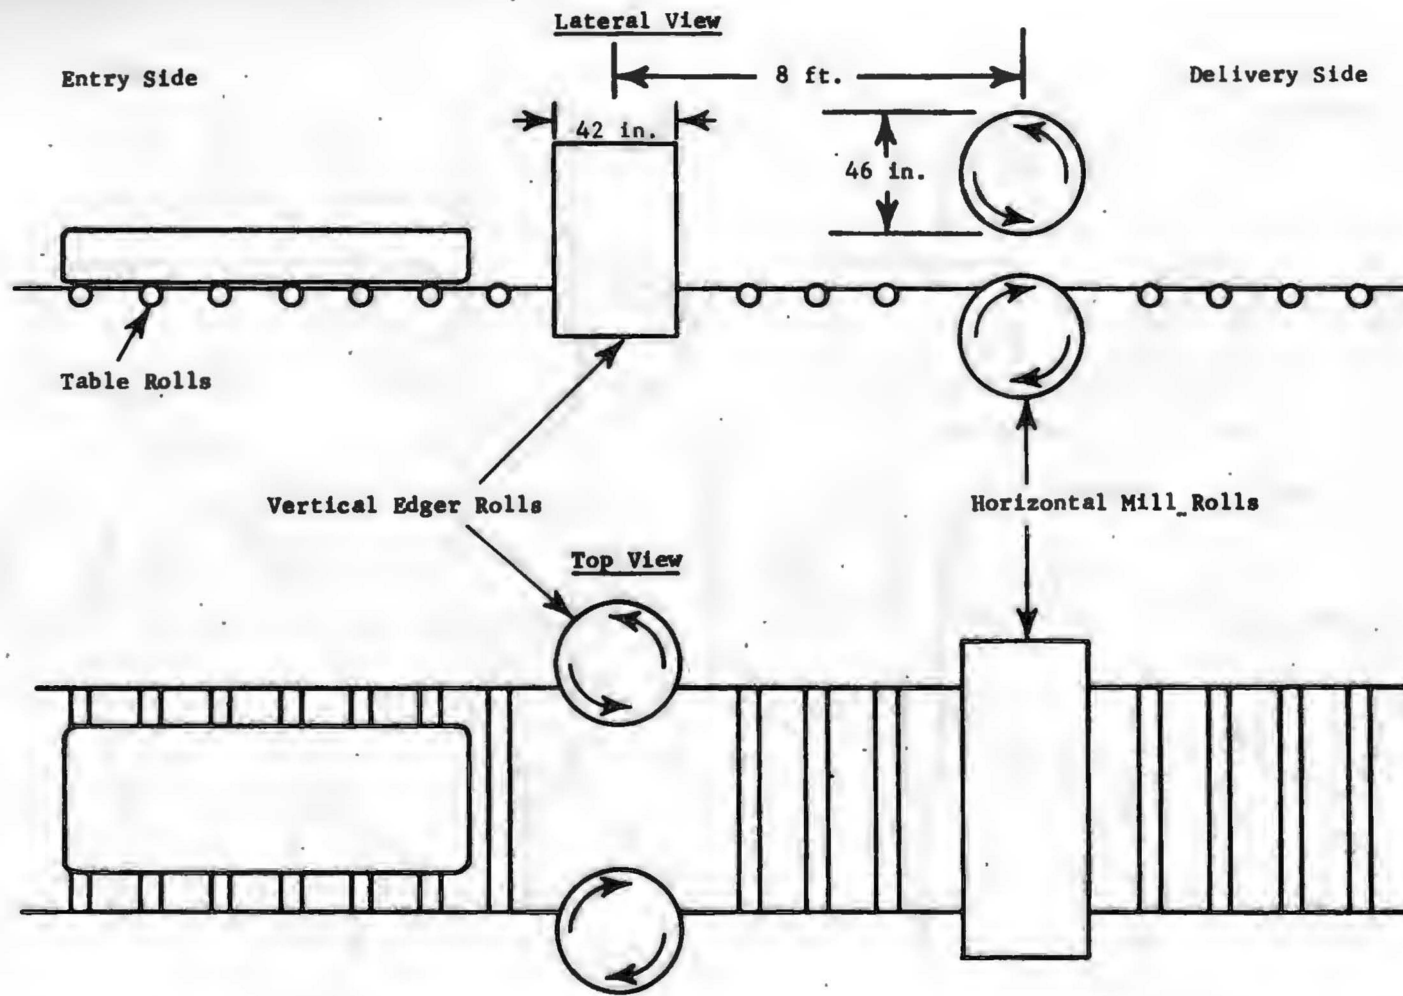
General layout of reversing slabbing mill with approximate dimensions.
